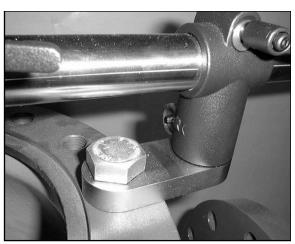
MOUNTING OF CLAMPING SHOES WITH BOLTS
